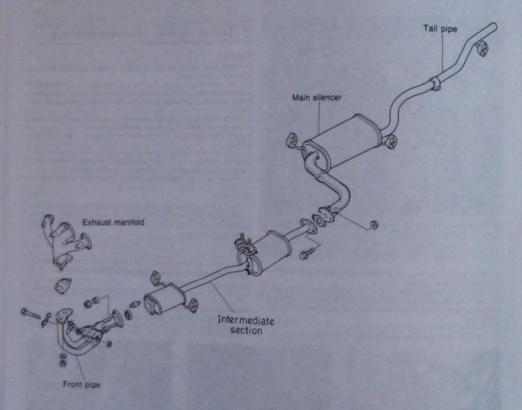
Exhaust system components - later models shown (Sec 19)
